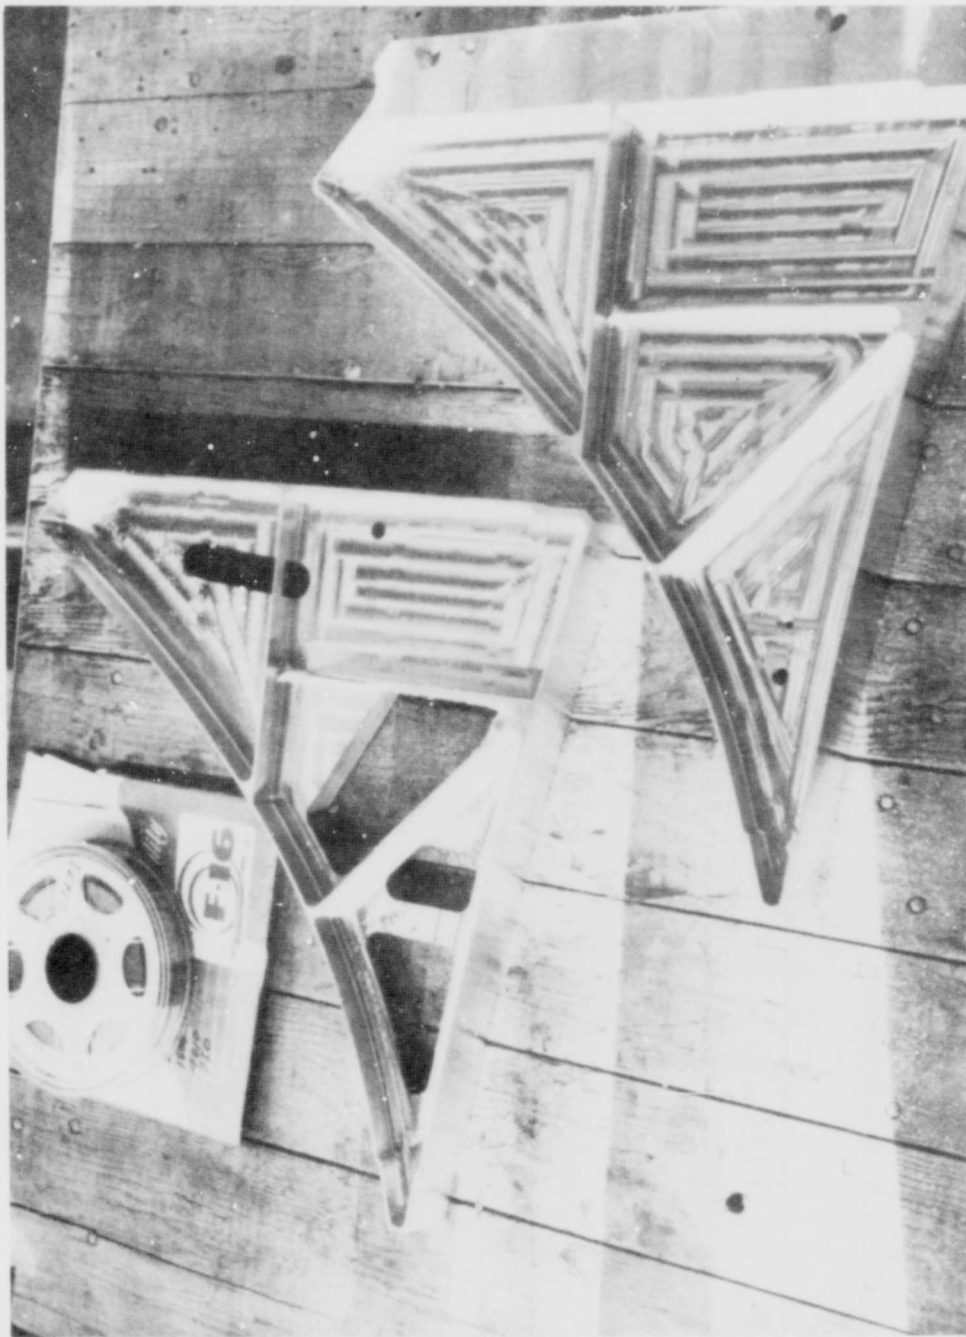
RTC/NC MACHINED PART - 16B1262
